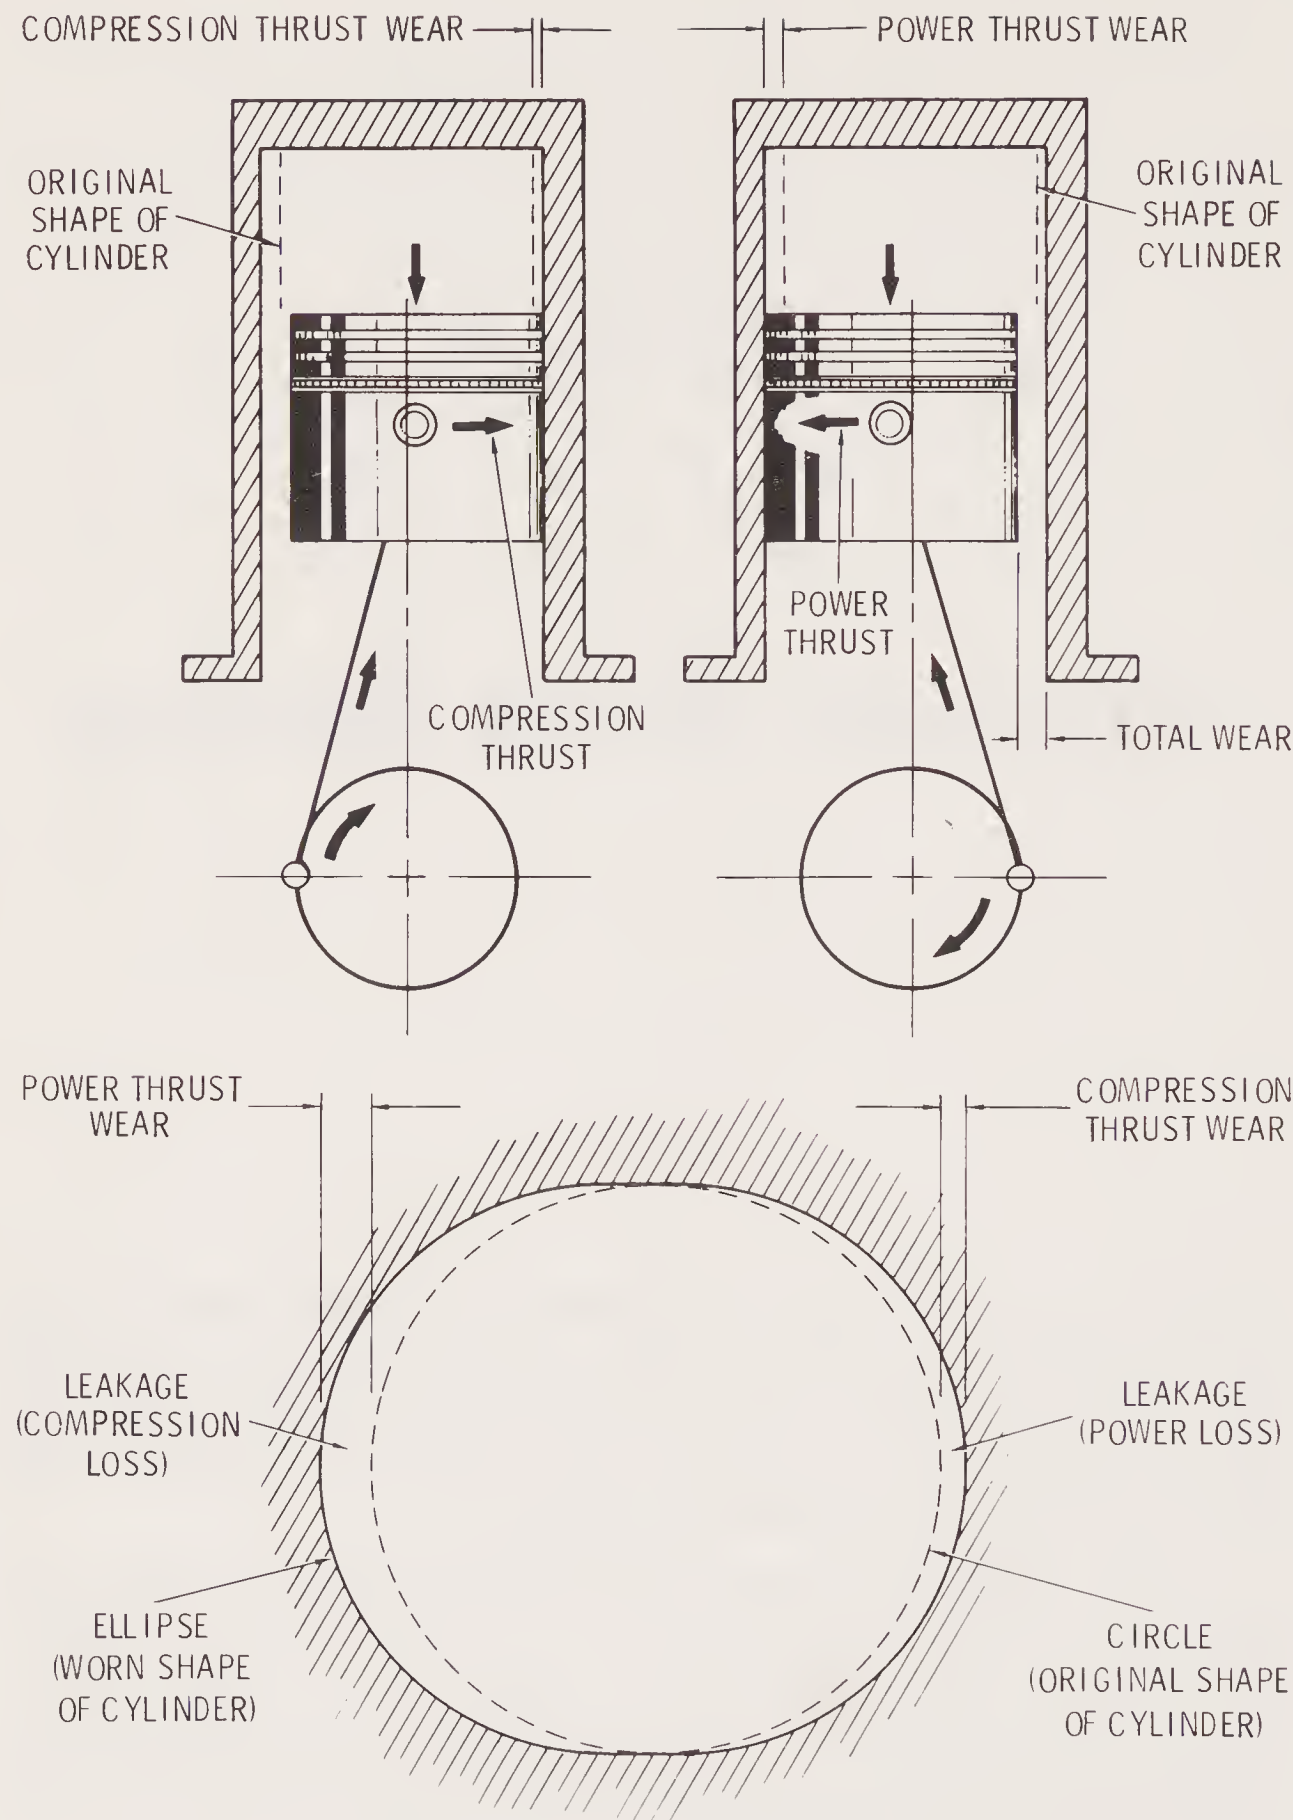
View of compression and power thrusts of piston and wear they cause.
